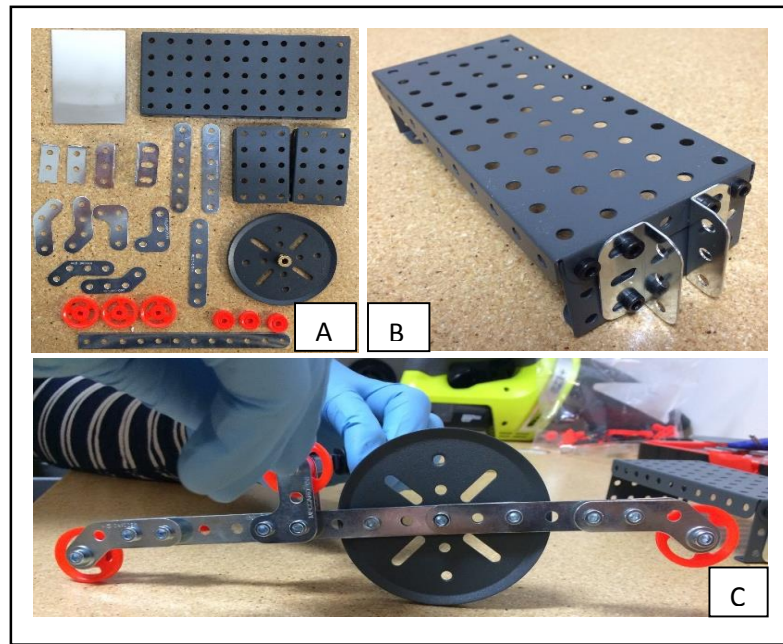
Peeling device parts and assembly. (A) Component parts, (B) Base part, (C) Upper part.
